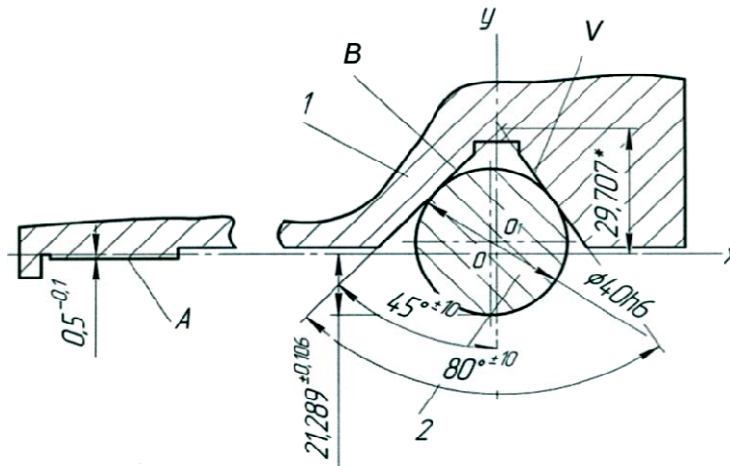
The existing scheme of dimensioning between the FCS, the carriage of the tool NT-250I:
